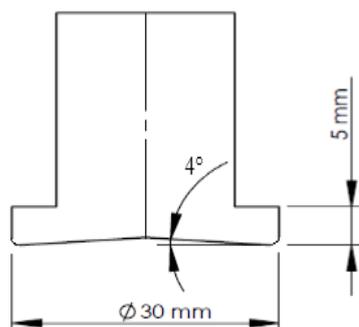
Cross-section of the novel FSSW tool used for welding HDPE sheets.
